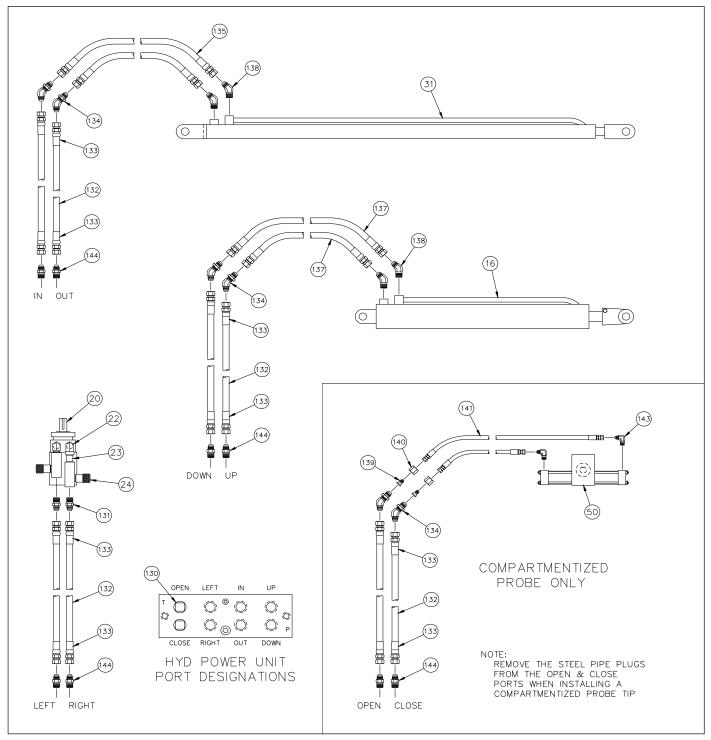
, HYDRAULIC HOSES & FITTINGS
